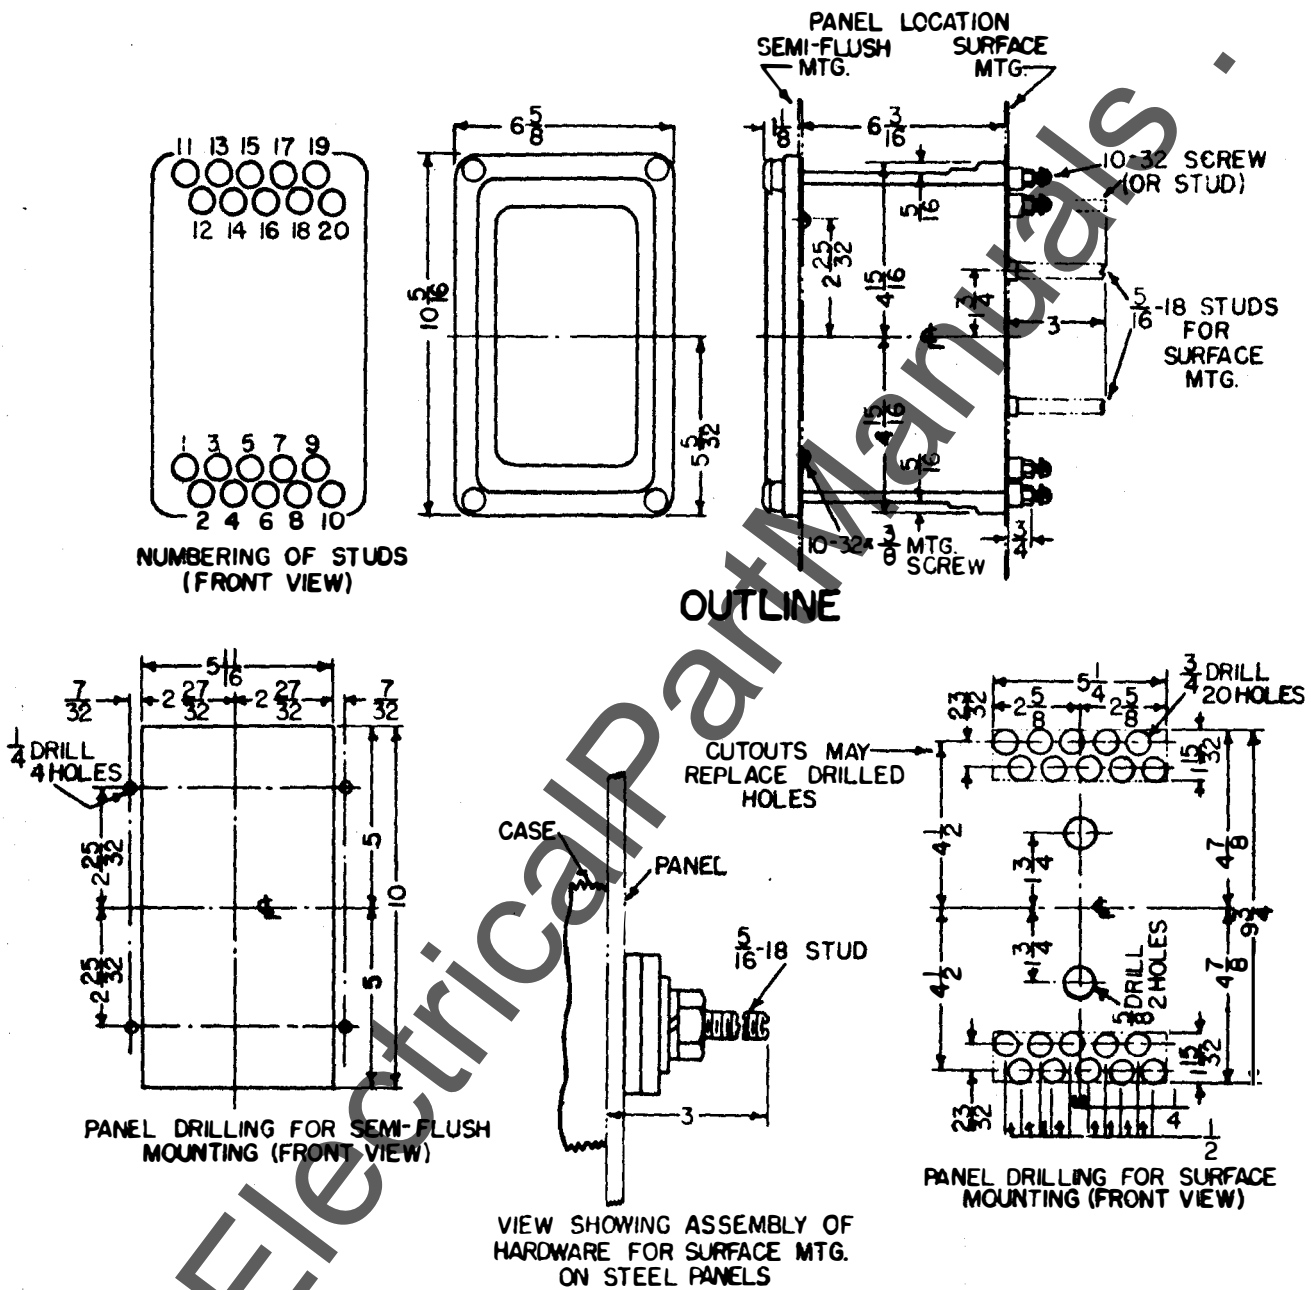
Outline And Panel Drilling Dimensions For Relay Types ICR53A, ICR53B And ICR54A
